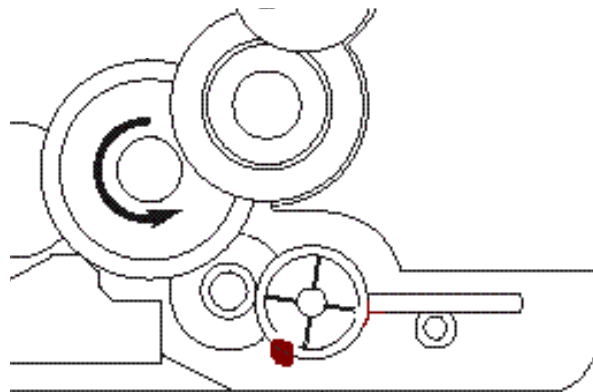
DISC TO STACKER GEAR ALIGNMENT 1 (DISC CLAMPED)
